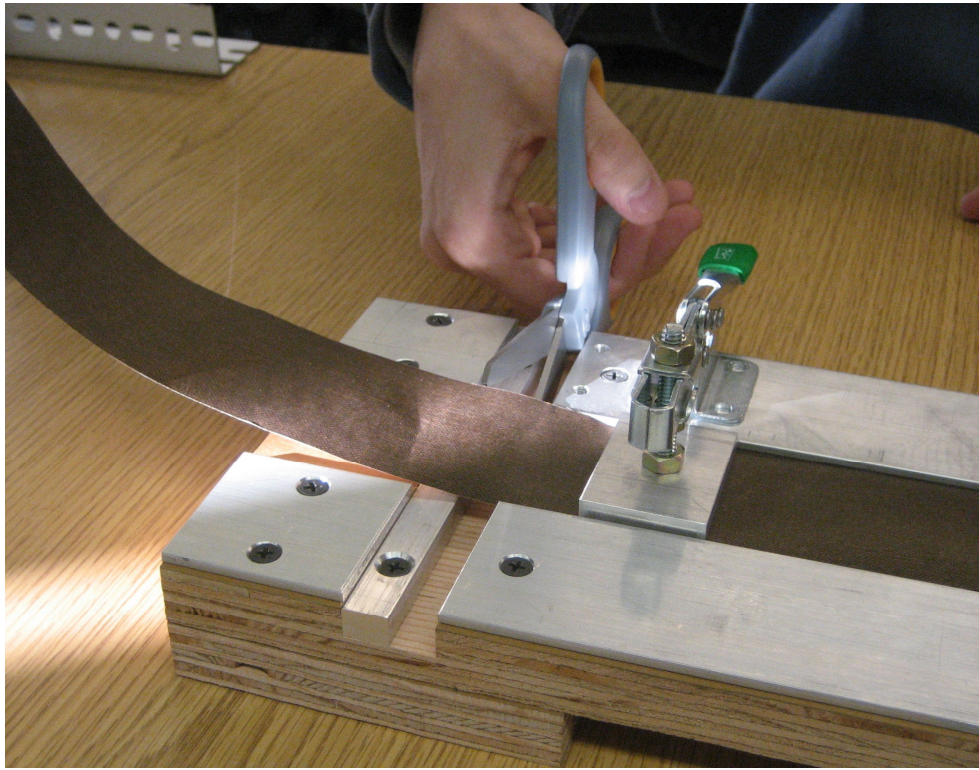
Scissors are used to cut the tape to length while being held in the fixture
